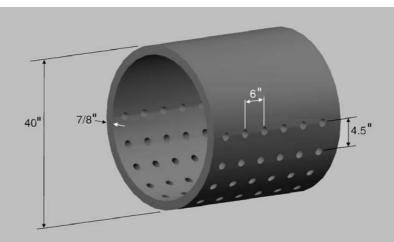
40 inch vessel with 3.53 inch drilled holes on lower half.
